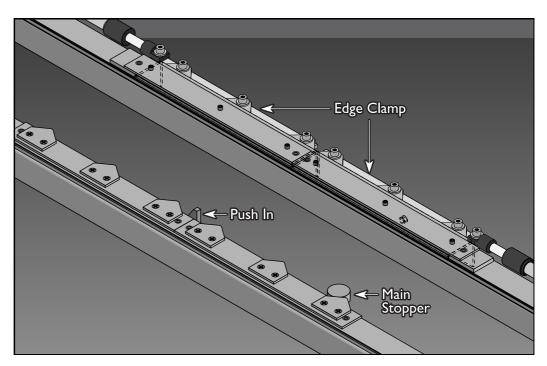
GEM Emerald-X(i) ^{II} Edge Clamping system.
